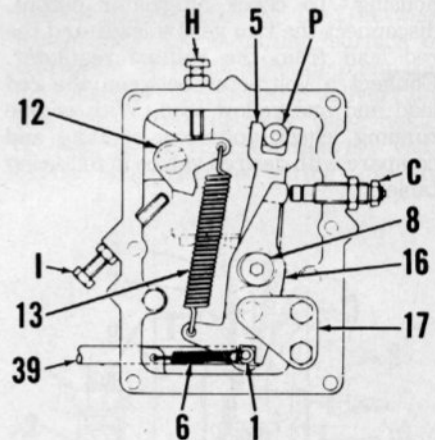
Drawing of governor and throttle control linkage. Refer to Fig. L4-20 for parts identification.
